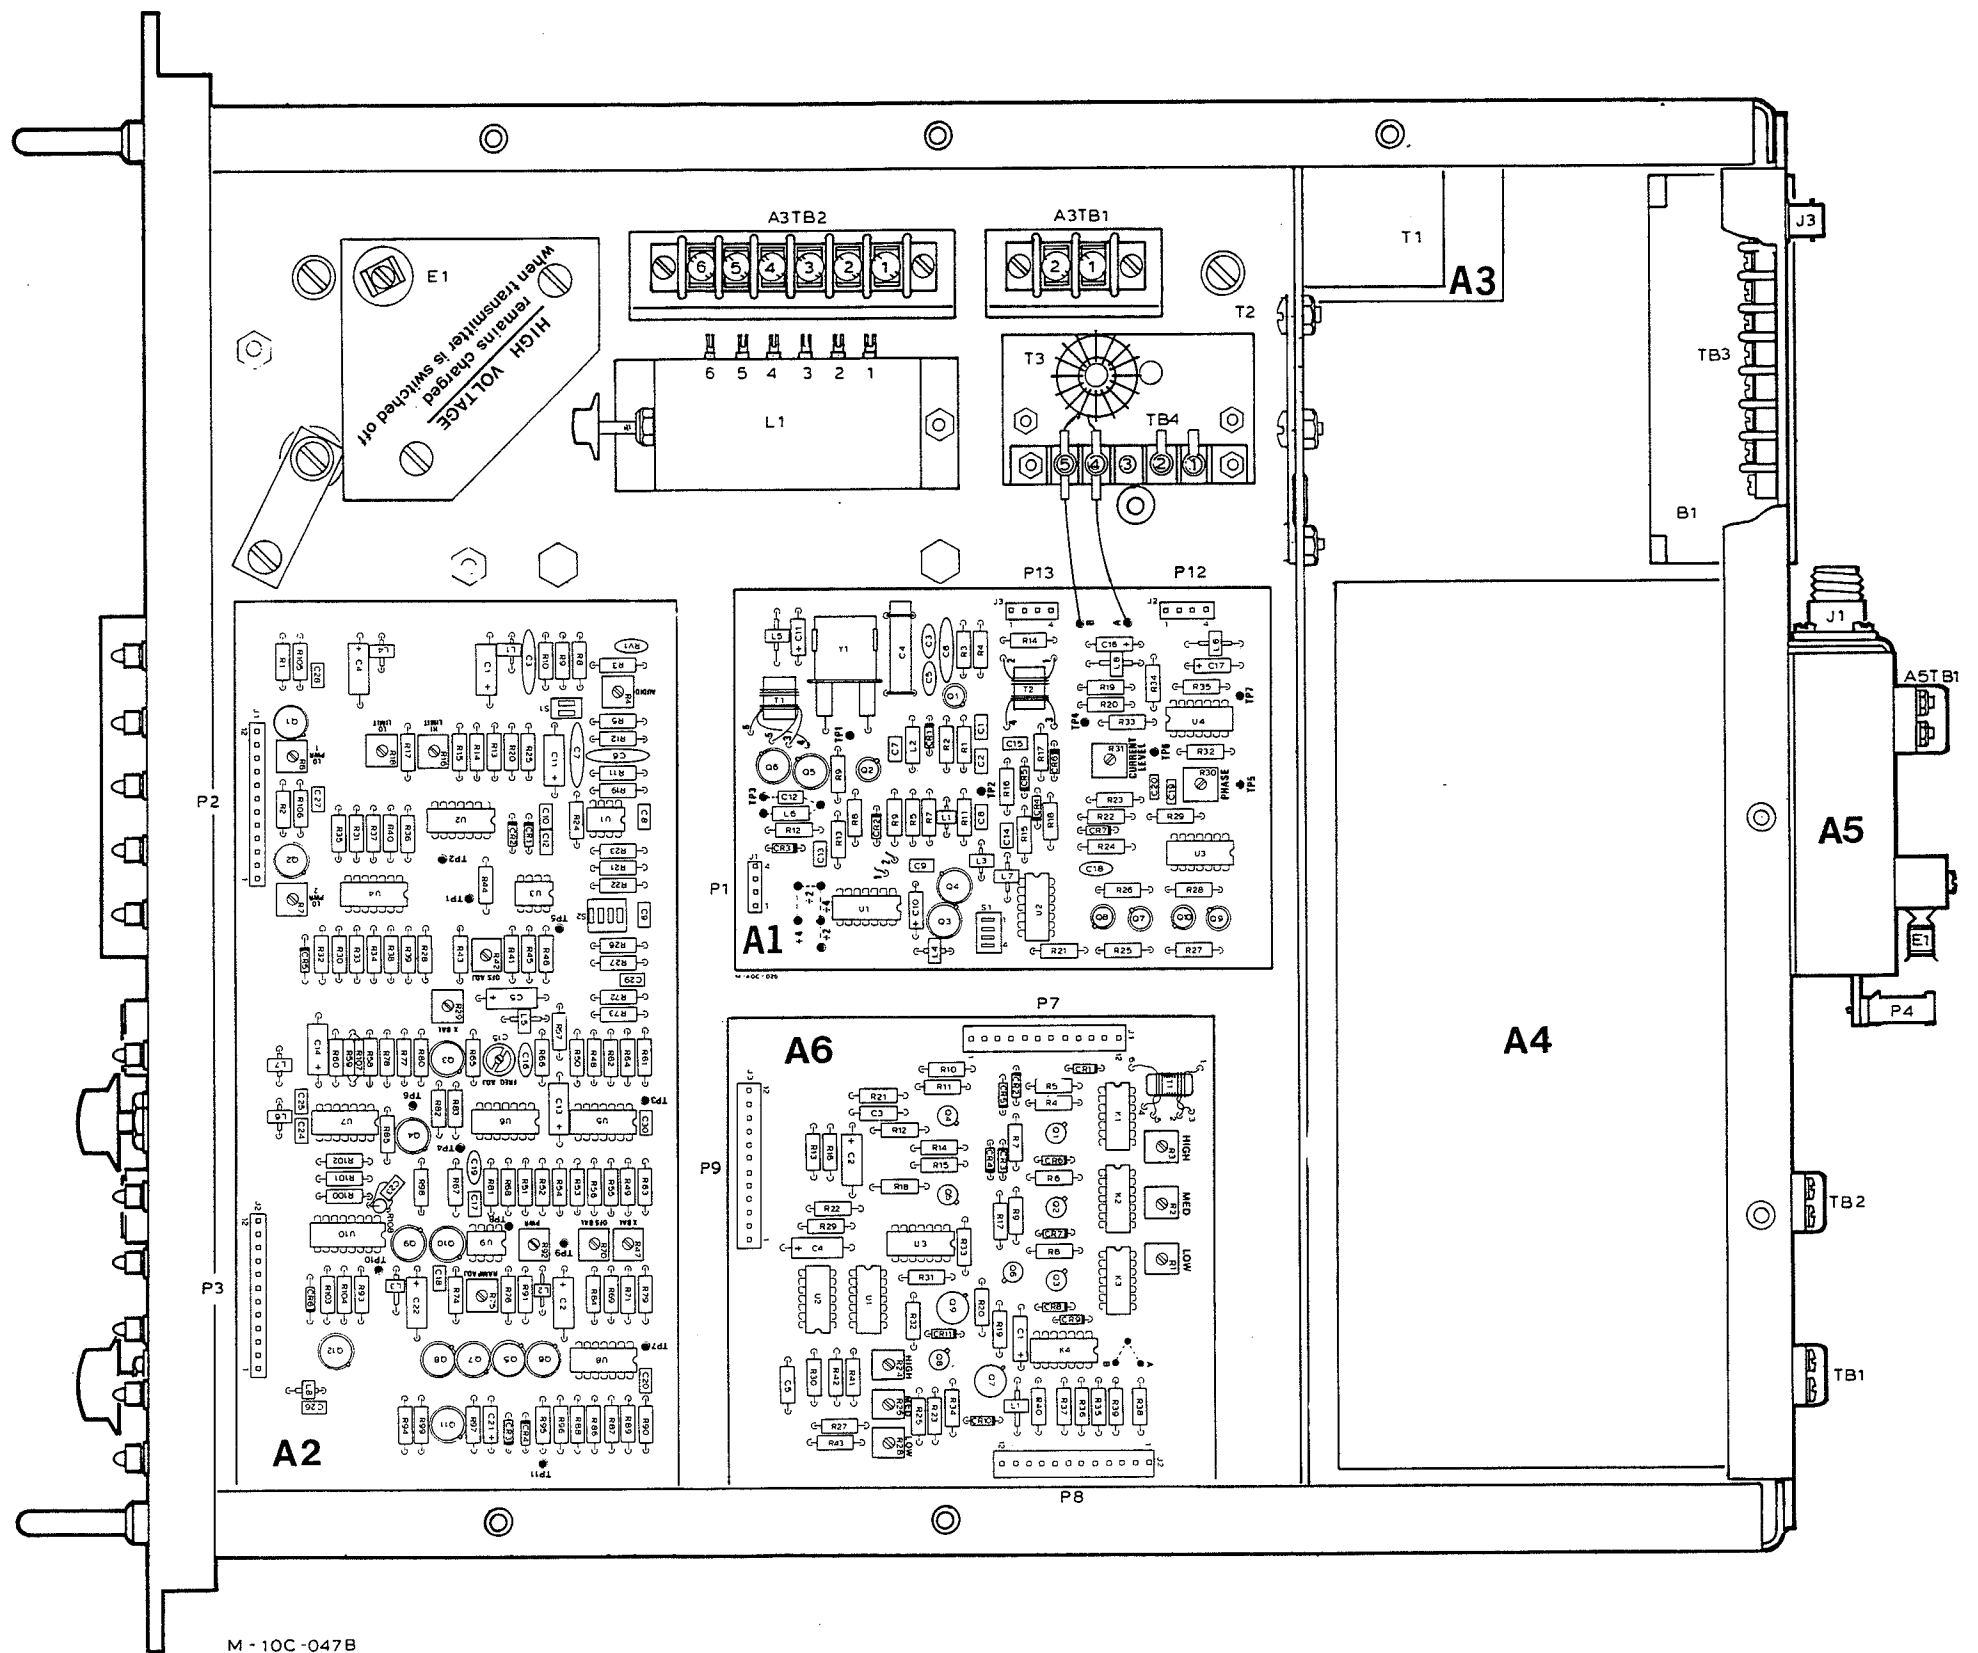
Assembly Detail - AMPFET P400 (Stereo) Transmitter (Top View)
